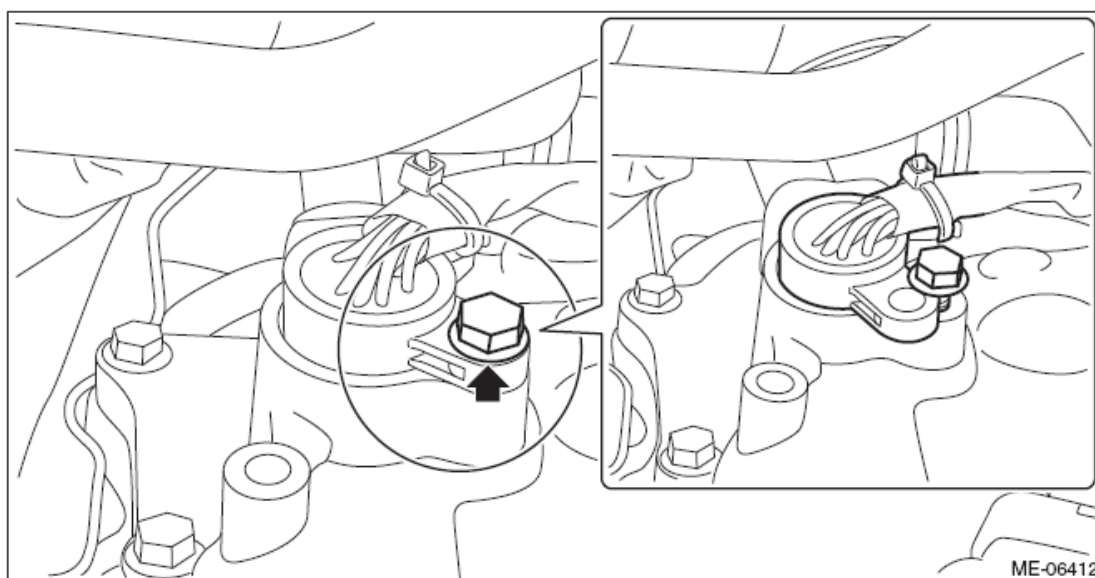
Locating Transmission Harness To Control Valve Body Bolt
